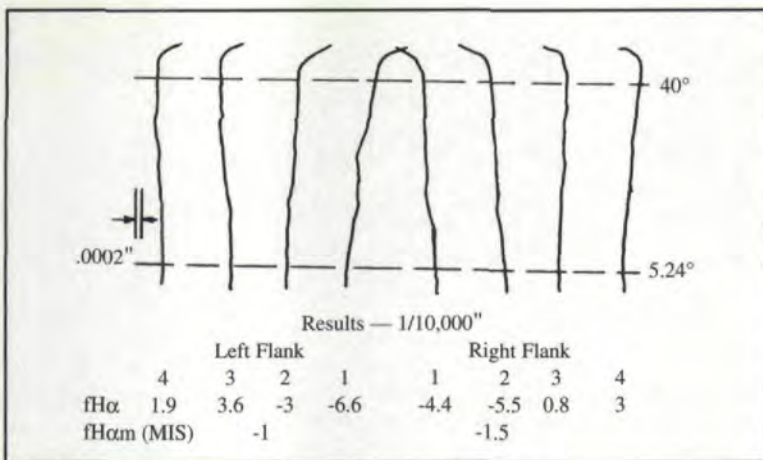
Involute tests—final production, 12-tooth pinion.
